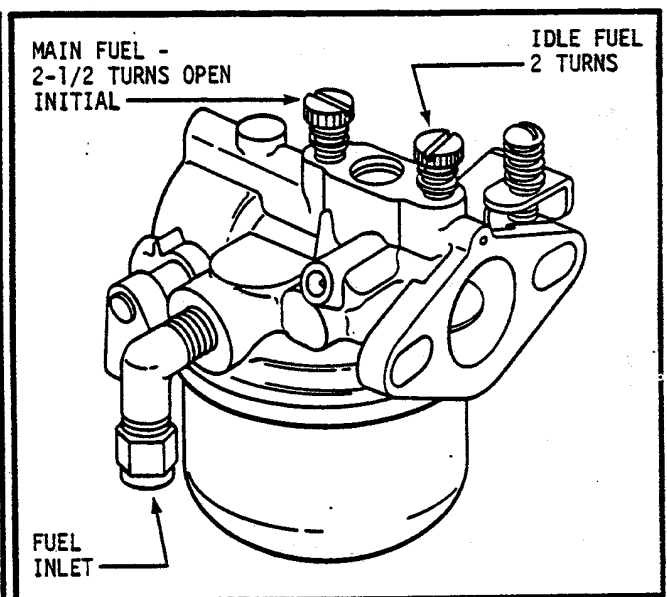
TYPICAL SIDEDRAFT CARBURETOR
